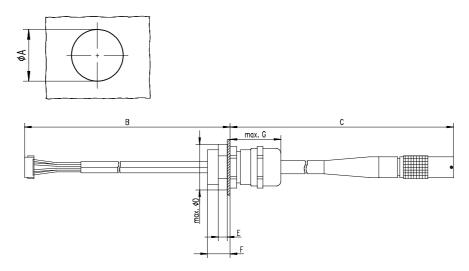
Interface Cable KA54, Prop. 2 (long thread)
